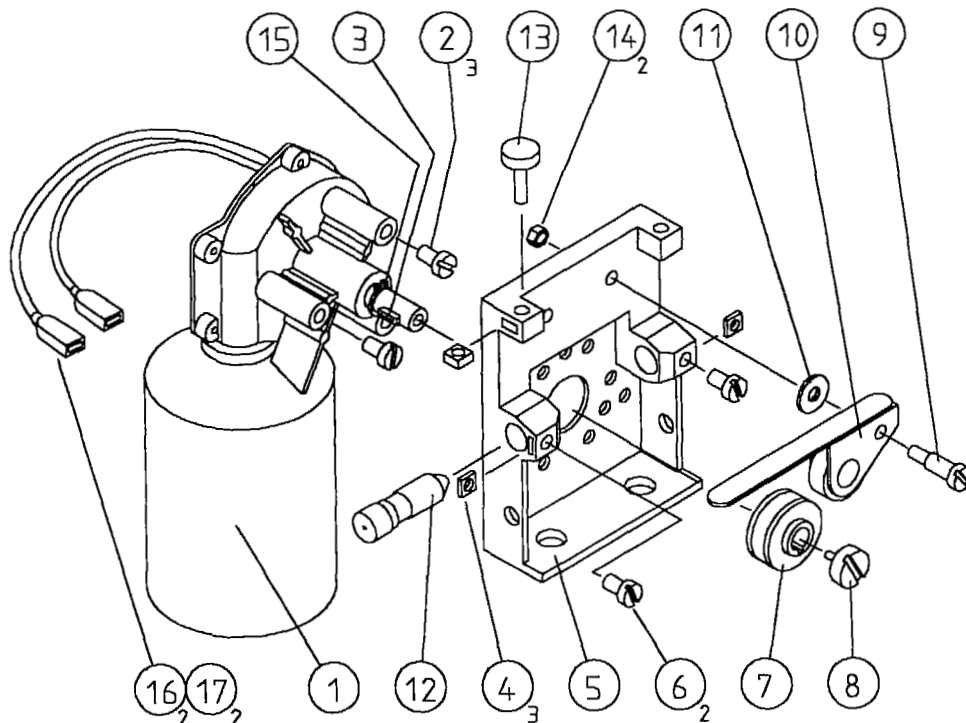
W26 TWO ROLL DRIVE ASSEMBLY
